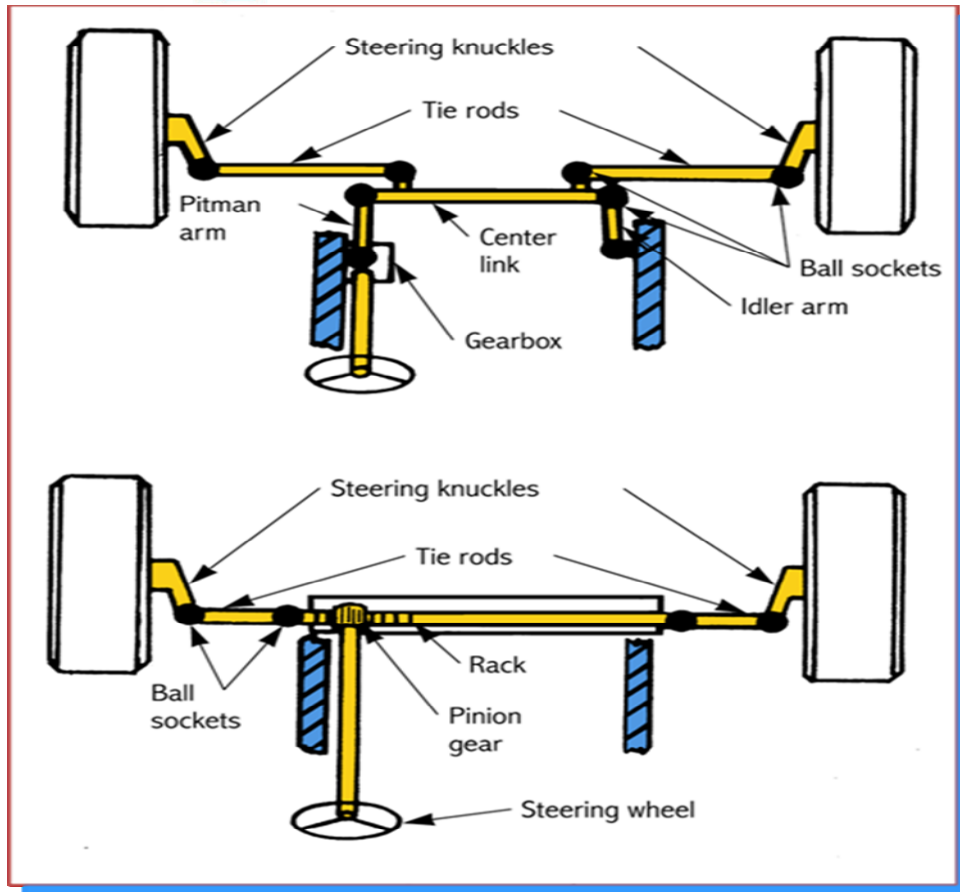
Basic linkage steering AND Basic rack-and-pinion steering
